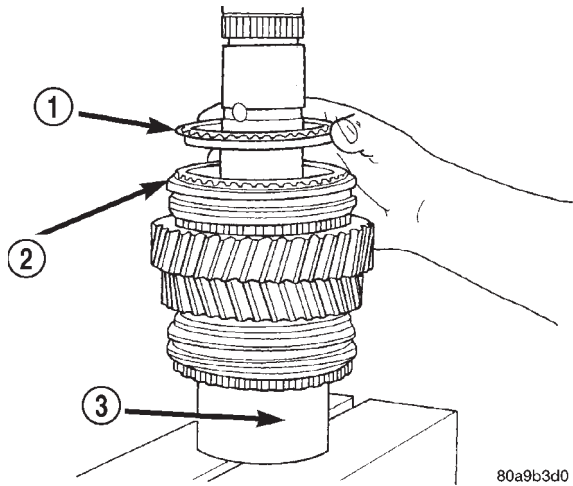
PRESS 1-2 SYNCHRO ASSEMBLY
